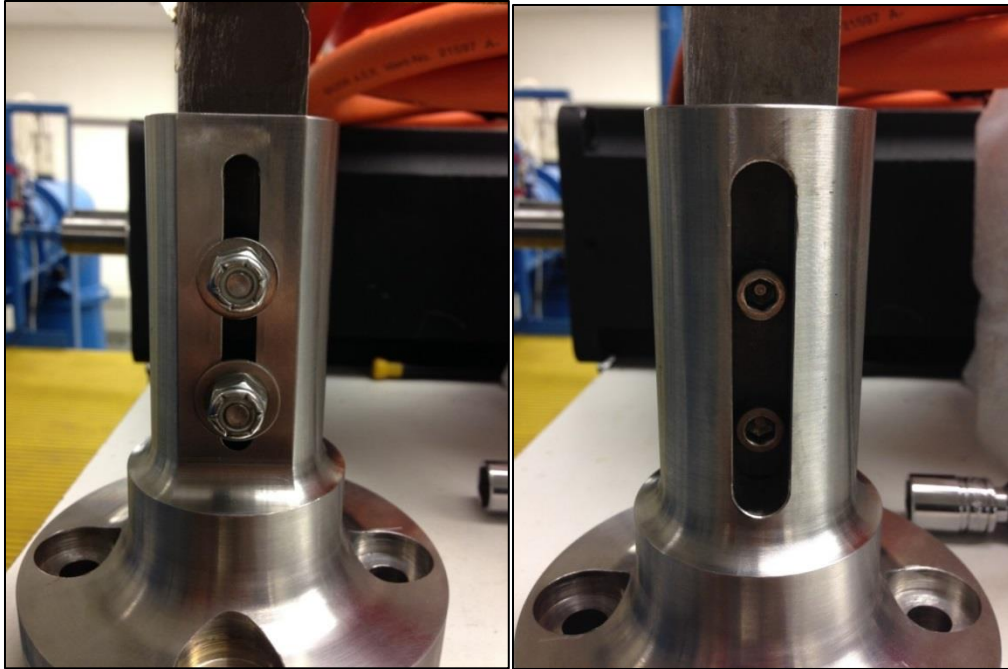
Both sides of the foil bracket showing the adjustable bolts holding the aluminum backbone in place.
